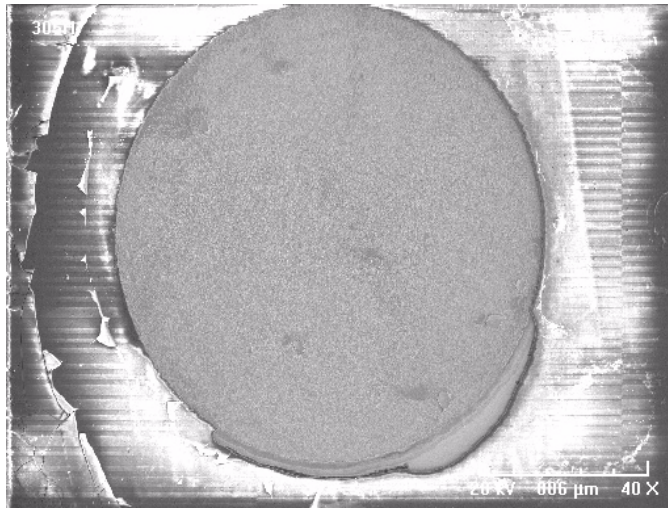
Fracture surface of drop test sample of SAC305.
